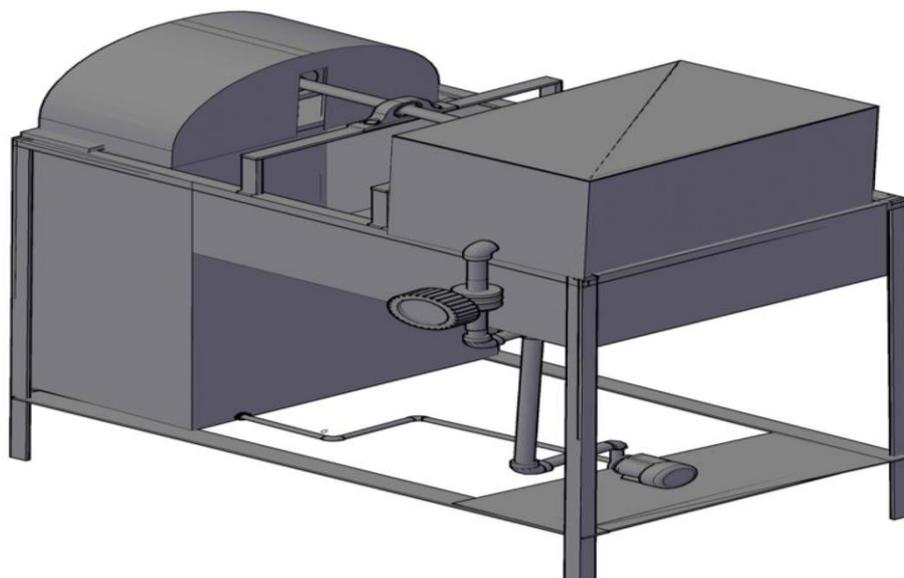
(3-D) Isometric drawing of the Front view of the Pelton wheel impulse turbine
